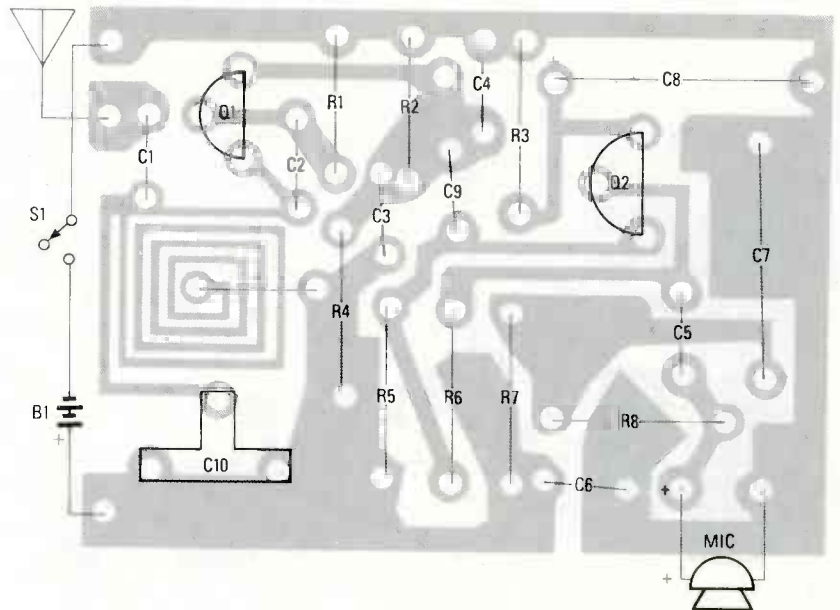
PARTS-PLACEMENT DIAGRAM. Solder the components to the board in the order of the Parts List.
